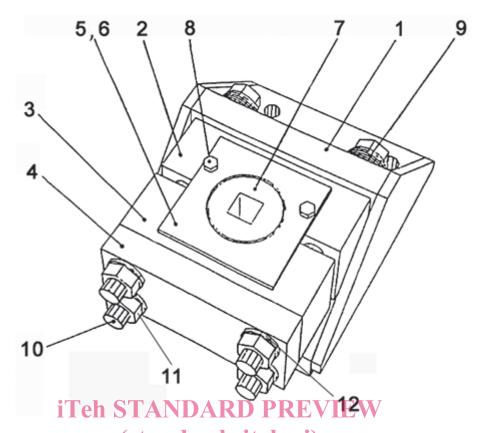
Brake device, largen For machines with shaft sizes 20 mm, 25 mm and 40 mm
